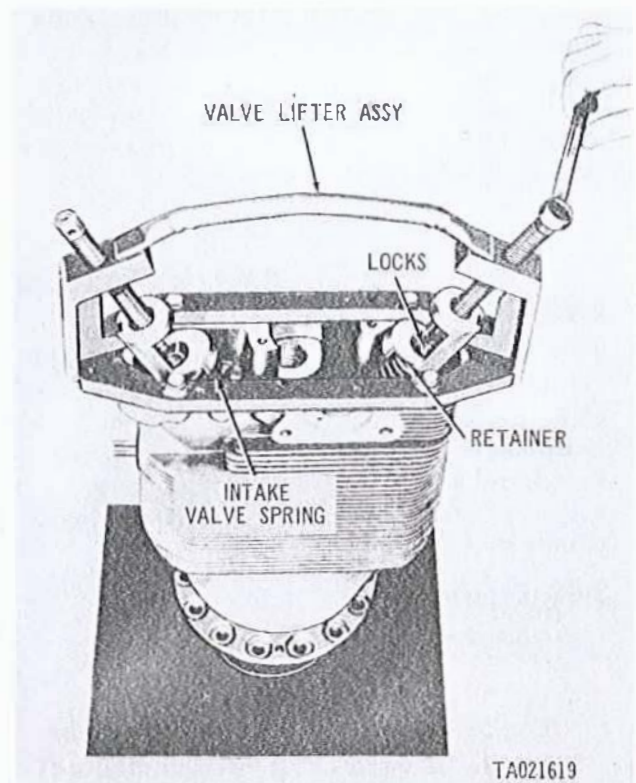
Compressing exhaust valve springs to remove or install upper valve spring retainer locks.
